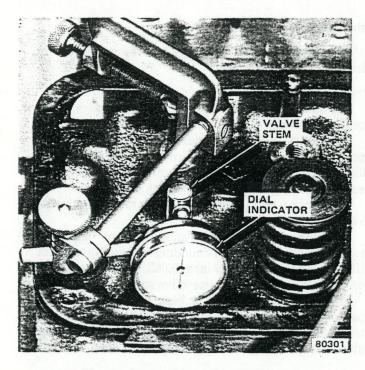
B-108 Valve Stem-to-Guide Clearance Measurement with Dial Indicator
